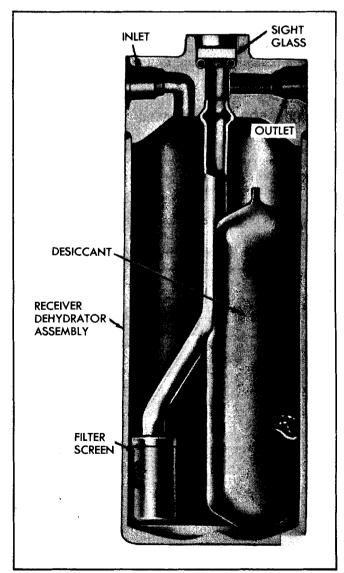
A-35 Receiver Dehydrator Assembly - Inside View
